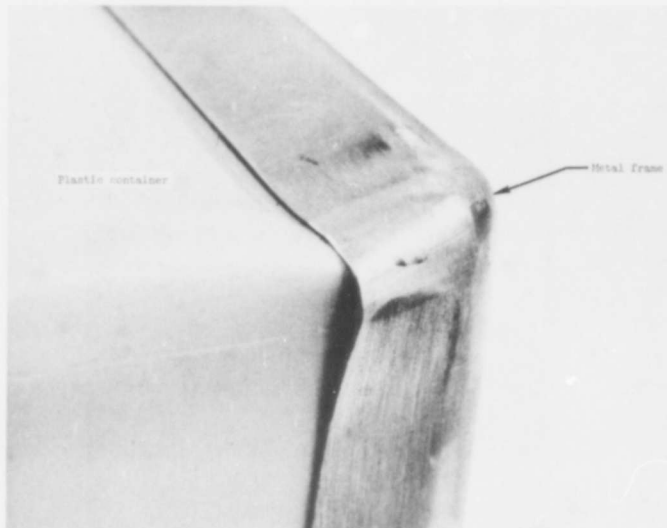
CORNER OF FRAME AFTER 6000 LBS. COMPRESSION TEST
